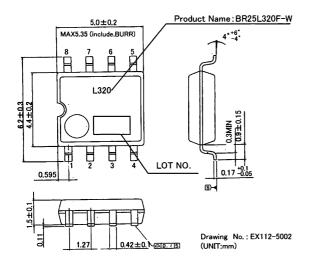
(a) PHYSICAL DIMENSION SOP-8 (BR25L320F-W)
